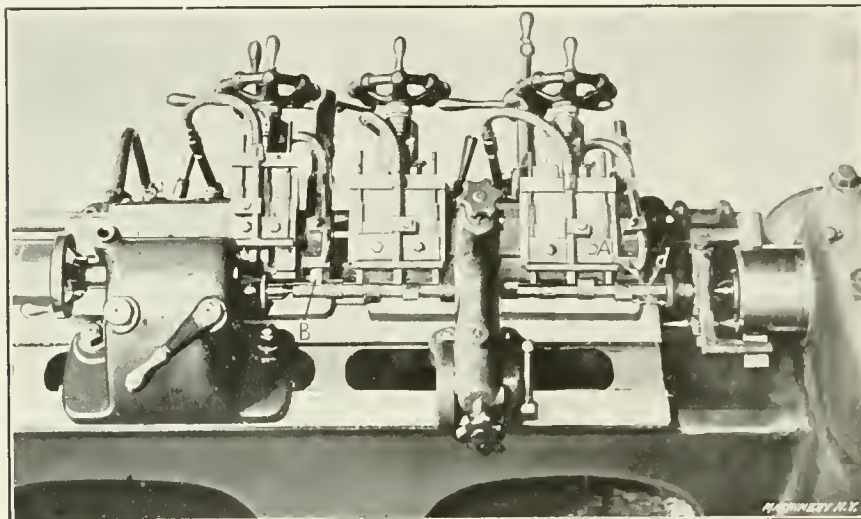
Rear View of a Lo-swing Lathe arranged for Turning Camshafts—First Operation
